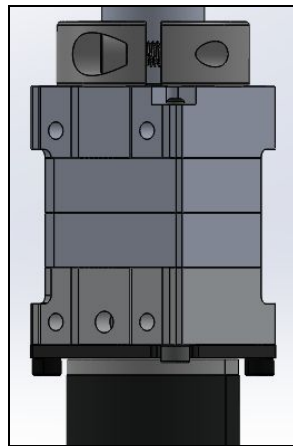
Motor Gearbox, Collar, and Shaft Assembly
